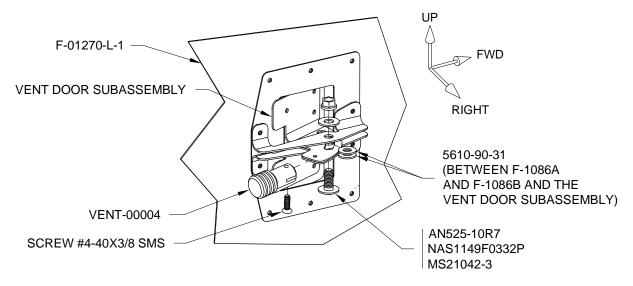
INSTALLING THE VENT DOOR SUBASSEMBLY
